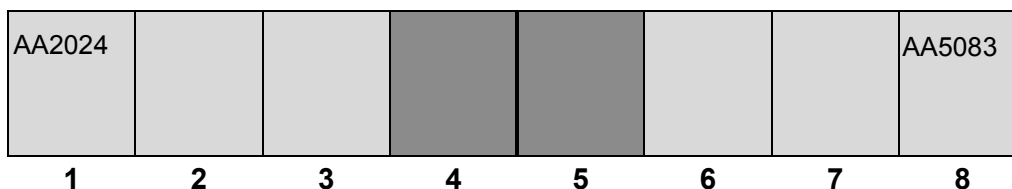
Zones of the welded specimen for measuring electrical conductivity.
